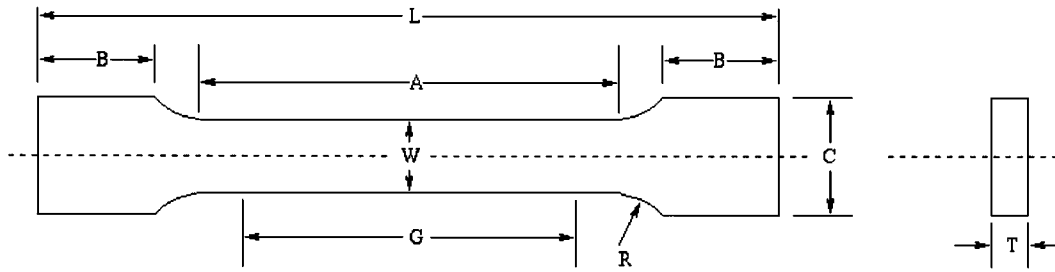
Typical sub-sized tensile test specimen where A = 15.90, B = 15.90, C = 4.80, L = 50.80, R = 3.20 and W = 3.20 (all in millimeters).
